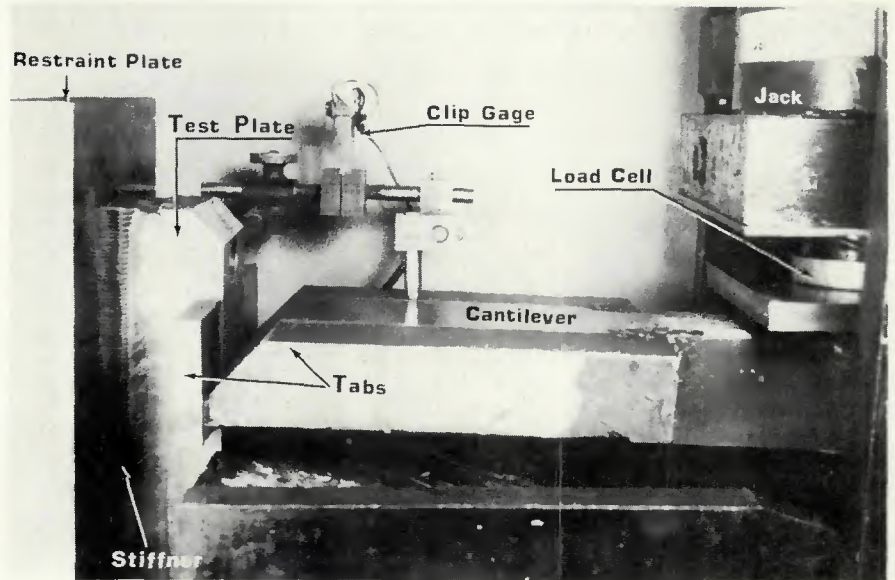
Lehigh test fixture with arrangements for recording the load and joint displacement
